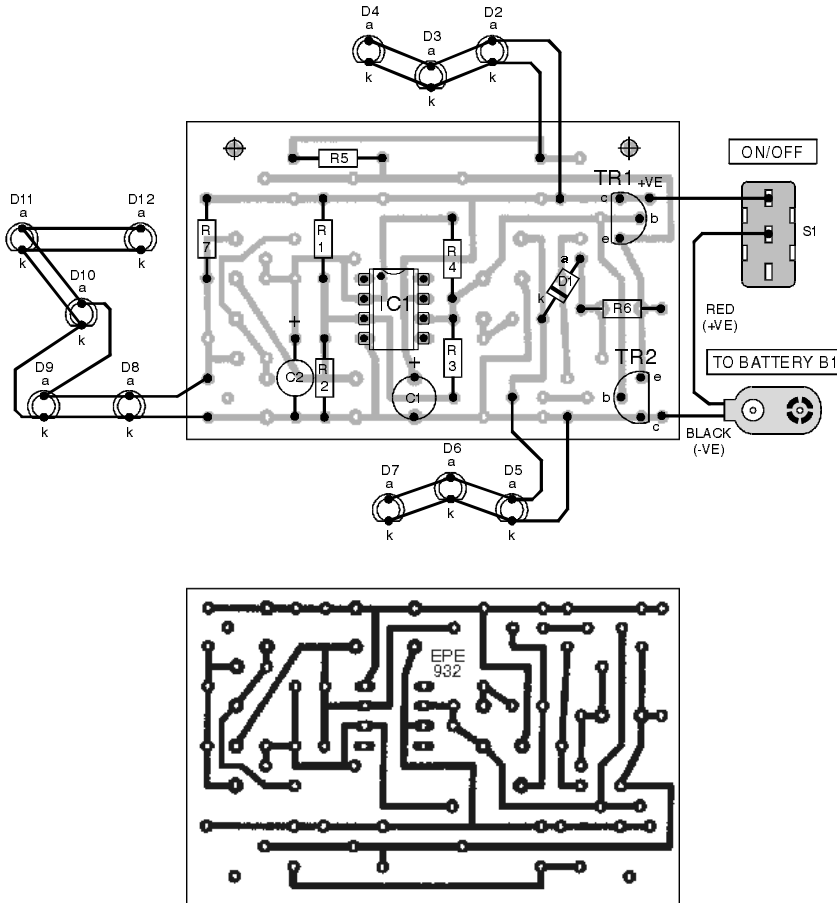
Snowman multi-project PCB component layout, interwiring, and (approximately) full-size copper foil master. Take care, not all holes/pads are used.
